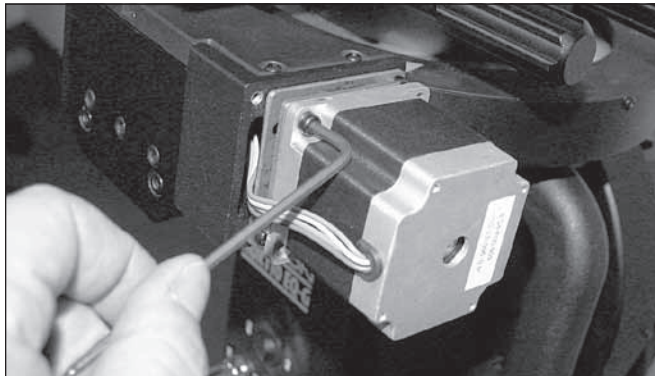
Loosen by a quarter turn the two diagonally opposed screws that fasten the motor to the seat plate.
